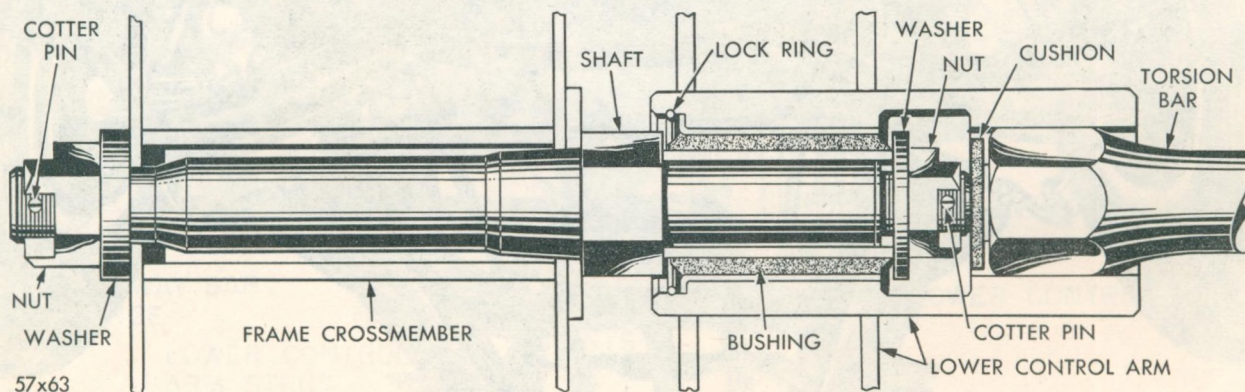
Lower Control Arm Pivot Shaft and Bushing Assembly
